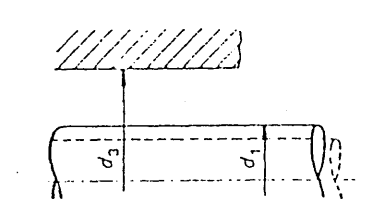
Unbalanced mechanical seal or soft packing with or without sleeve
